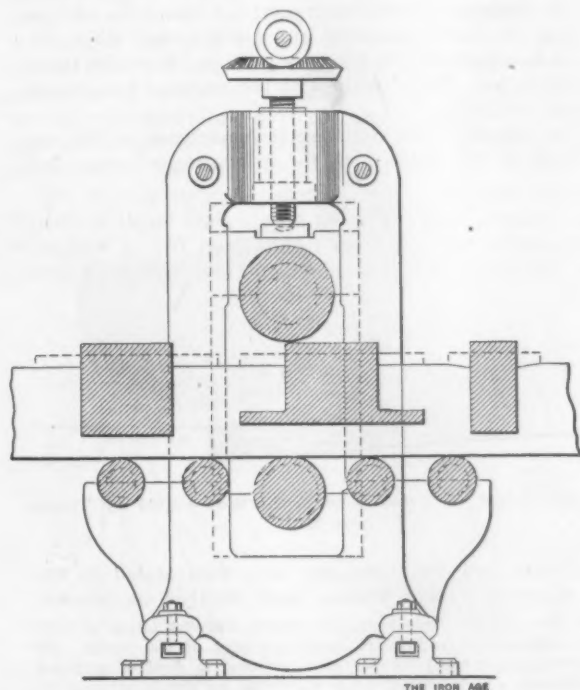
End Section of the York Transverse Mill for Rolling Flanges on Ingots.
